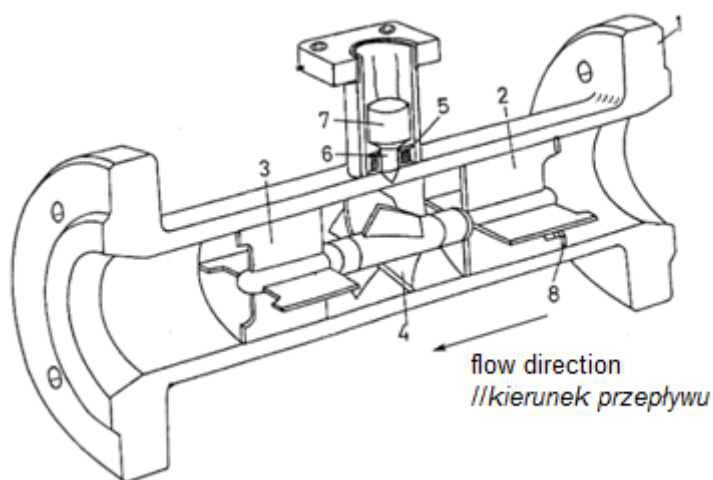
Turbine flow meter, 1 – housing, 2 – front rotor support, 3 – rear rotor support, 4 – rotor, 5 – inductor, 6 – core, 7 – magnet, 8 – pressure ring
